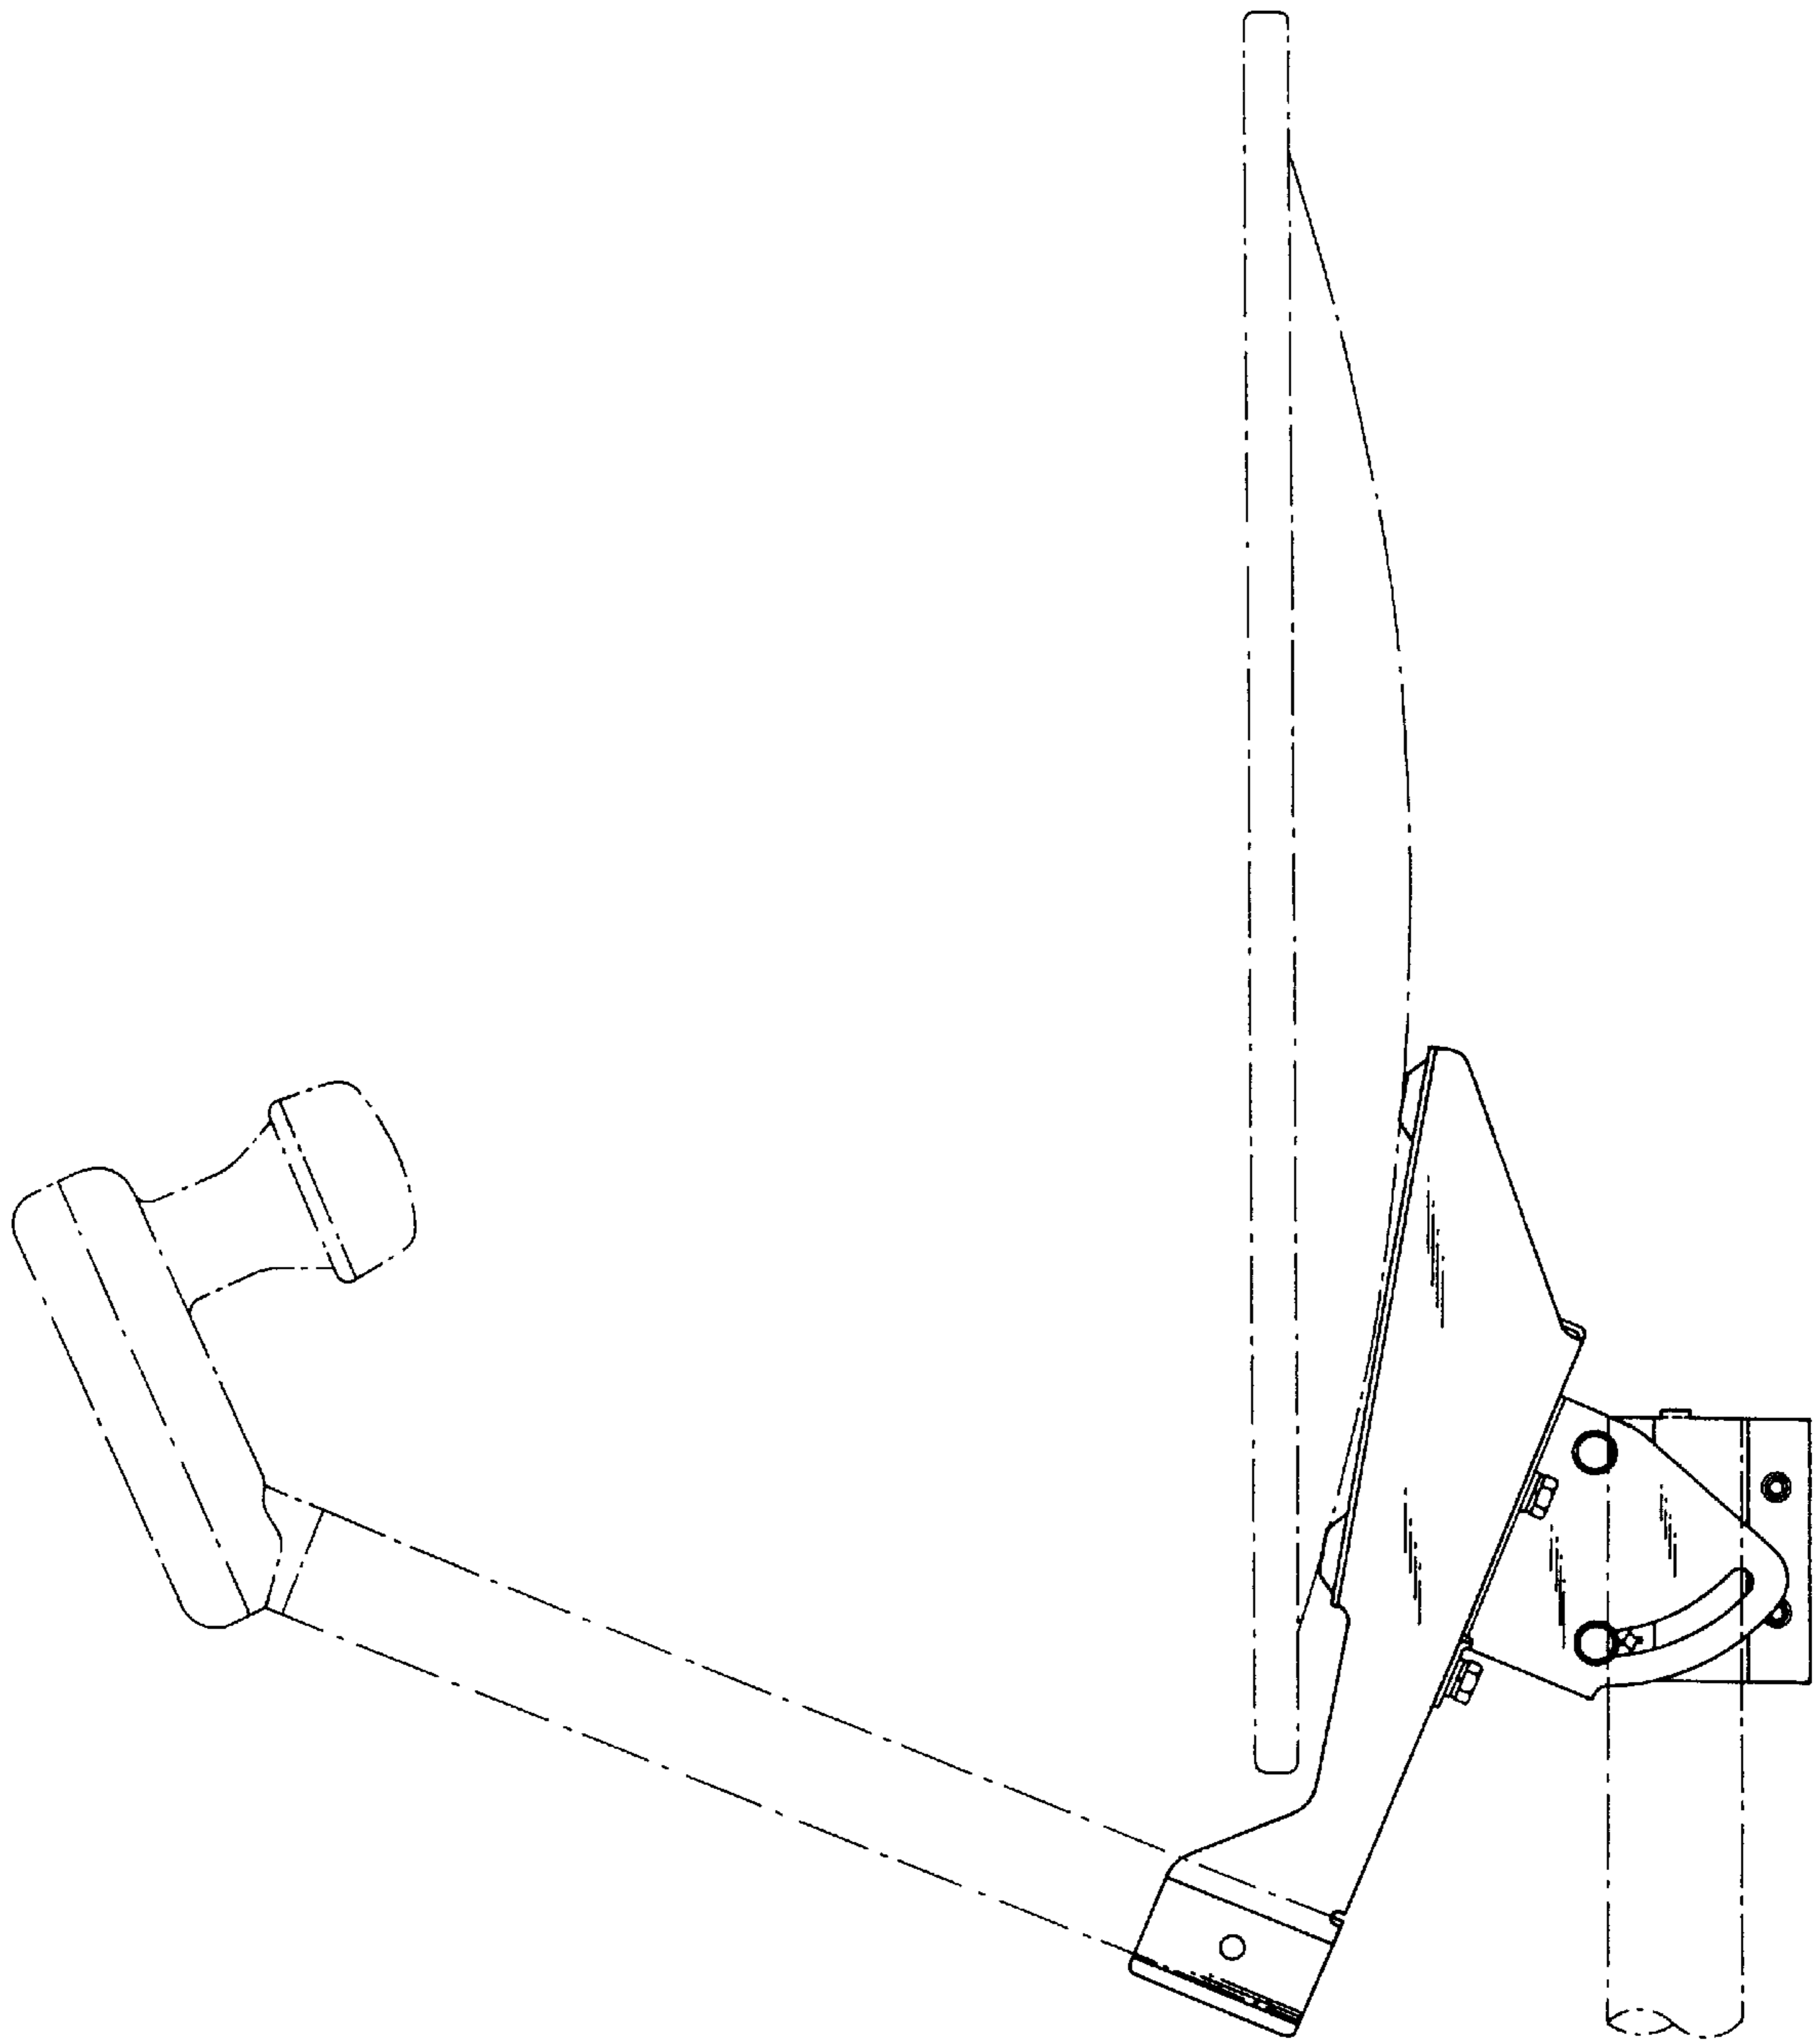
is a right side elevational view of the device shown in FIG. 2.
